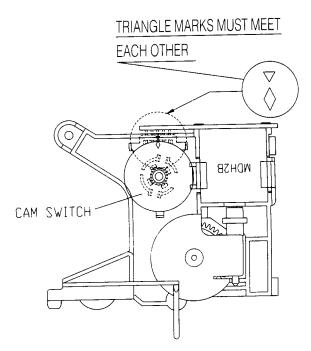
DATUM POSITION OF CAM SWITCH TRIANGULAR MARKS
